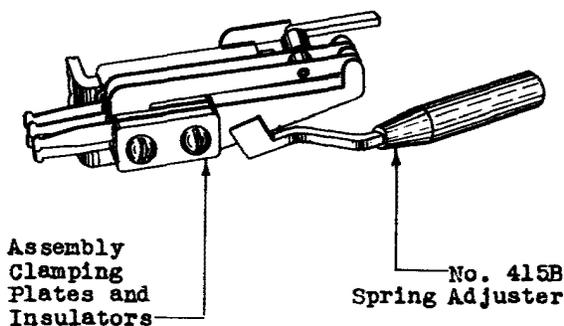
Fig. AH – Adjusting Spring to Meet the Spring Gauging Requirements
